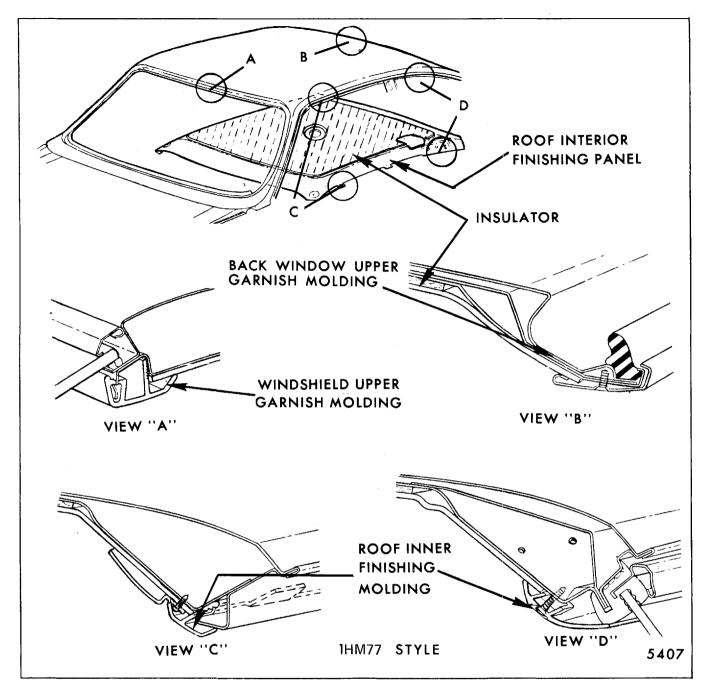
Headlining (Roof Interior Finishing Panel) Assembly - 77 Styles (07 Styles Similar)
